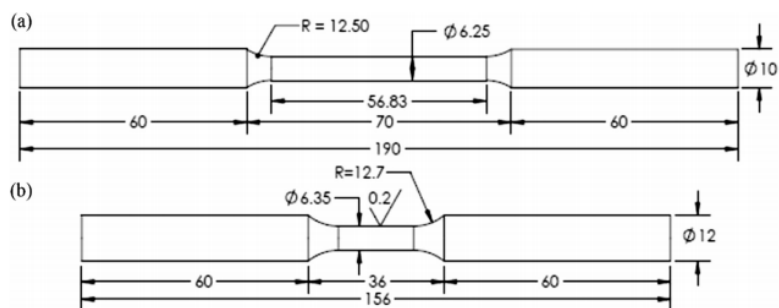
Details of the specimens: (a) tensile test and (b) LCF test (units in mm).
